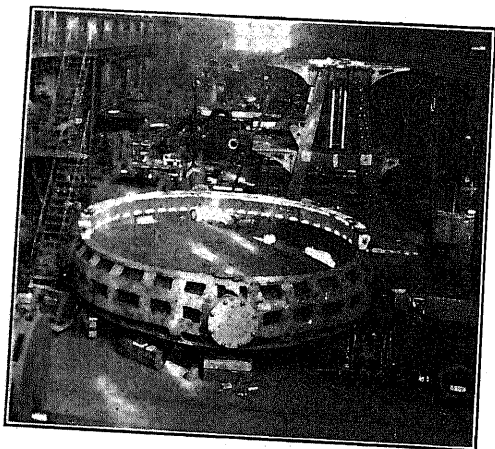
BUTTERFLY VALVE. ASSEMBLY OF HOUSING WICKET AND OPERATING SHAFT
